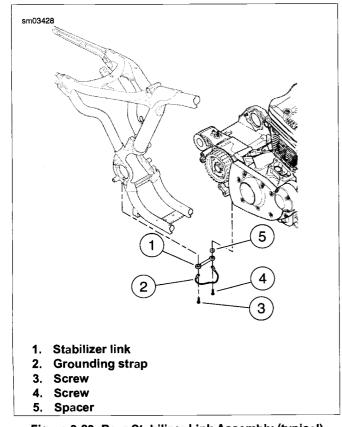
Rear Stabilizer Link Assembly (typical)
